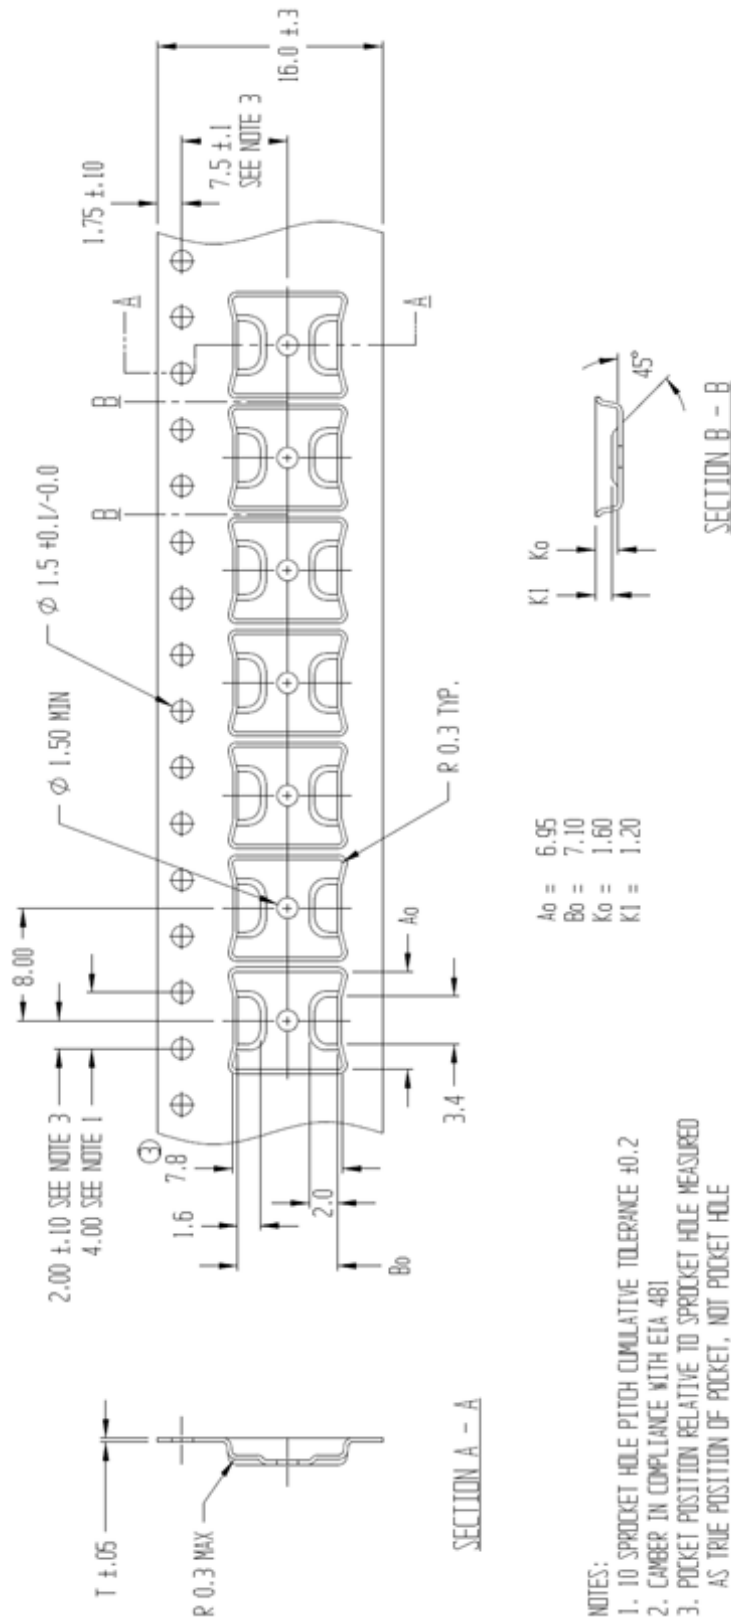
Tape drawing for TSSOP-20 (dimensions in mm)
